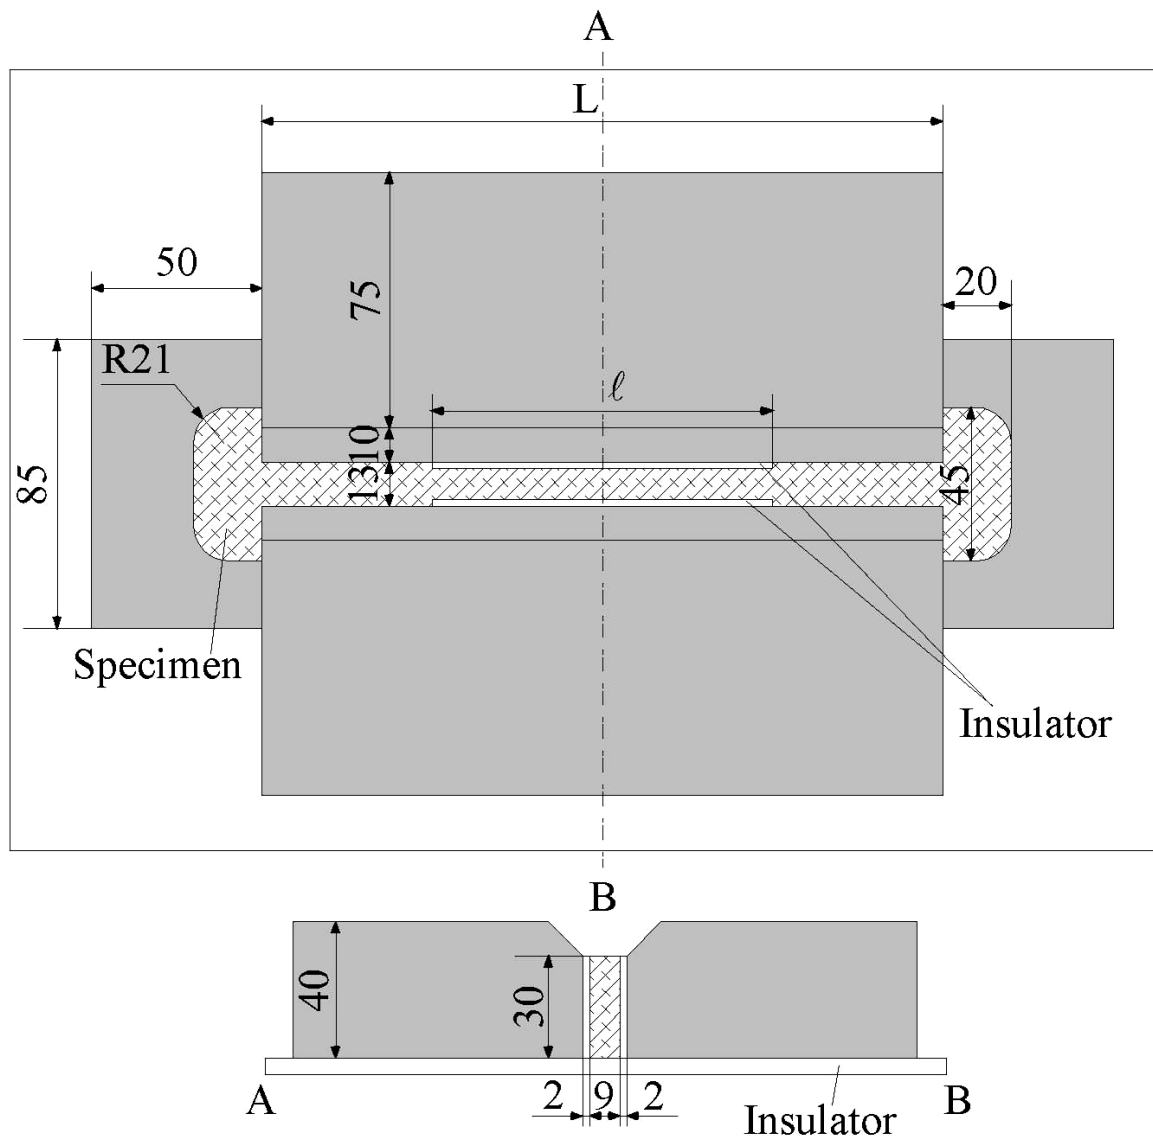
Shape and size of permanent mold for solidification cracking test.
